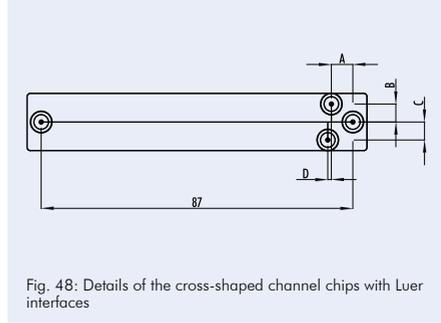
Details of the cross-shaped channel chips with Luer interfaces
